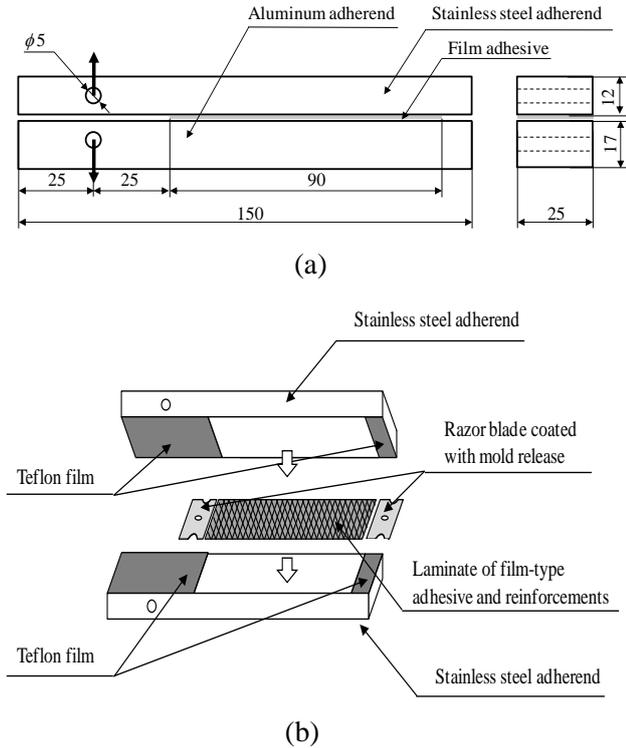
Schematic drawing of the adhesively bonded metal joint specimen for DCB test (dimensions in mm): (a) test specimen; (b) fabrication process.
